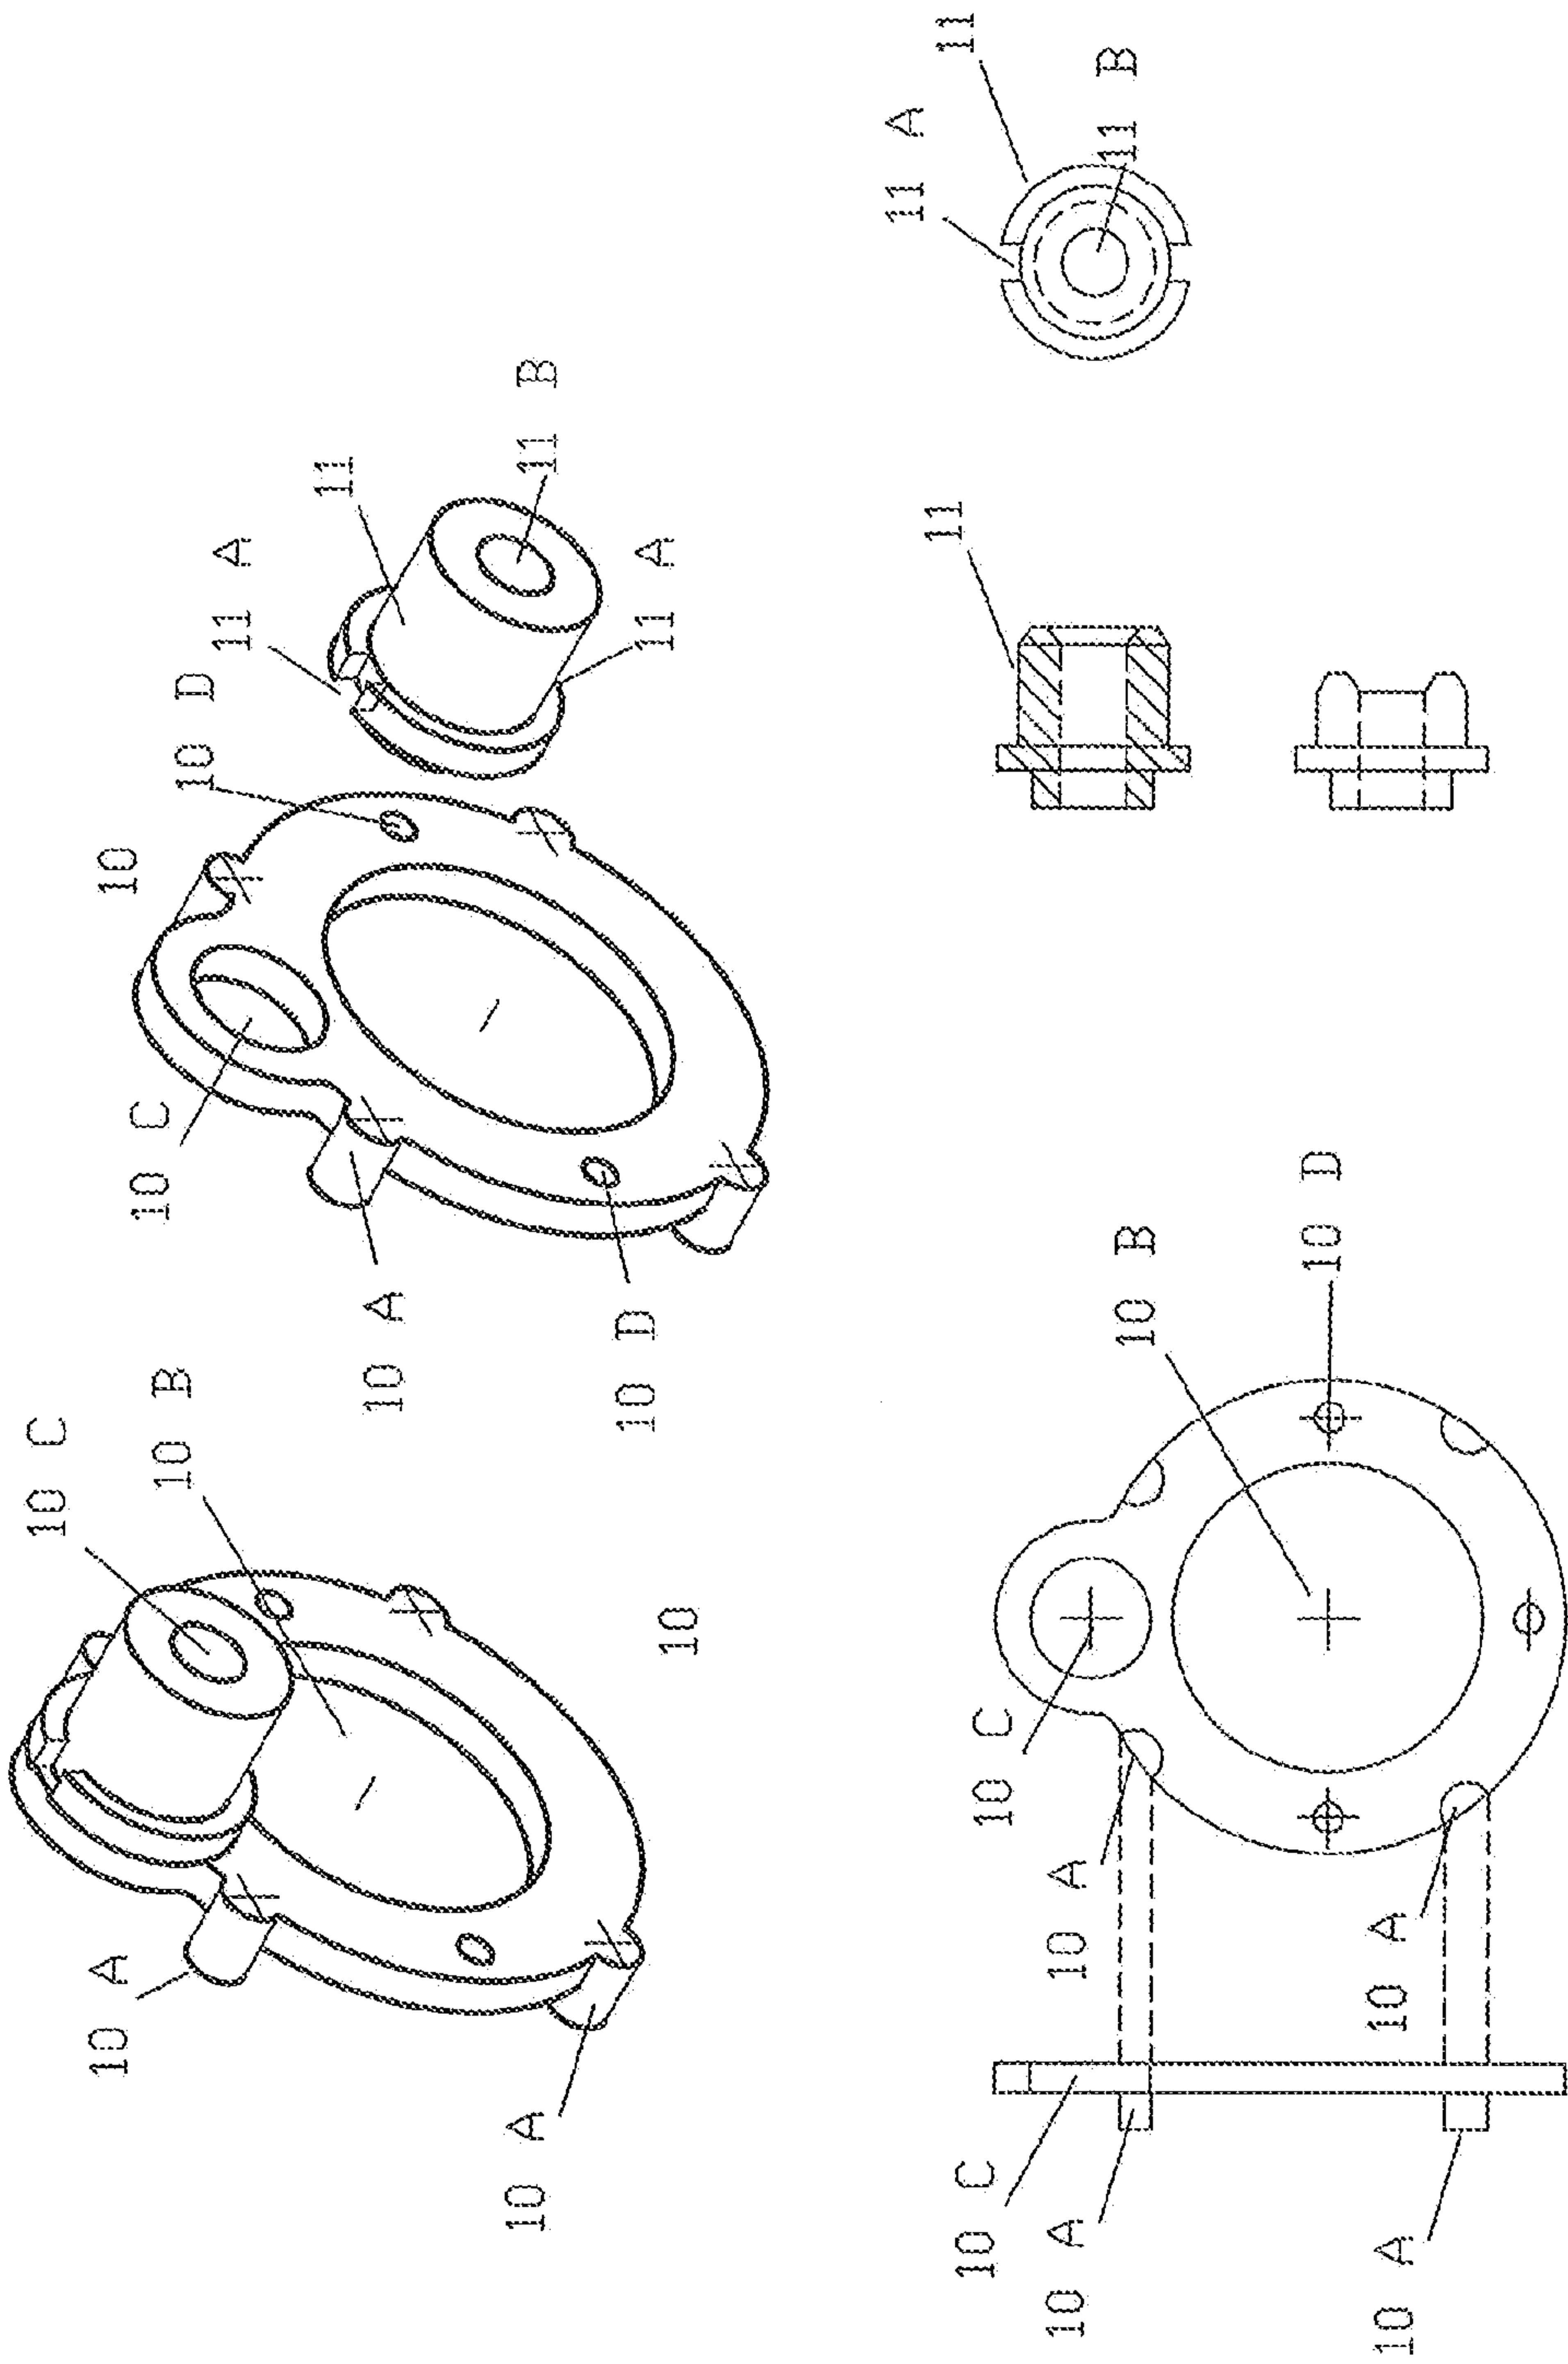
TUBE SUPPORT ADAPTER PLATE
